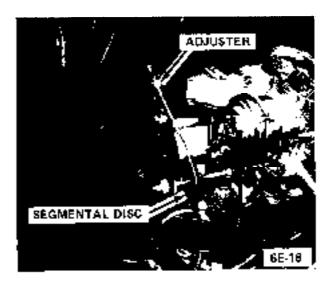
E-16 Bowden Control Wire Adjuster and Segmental Disc
